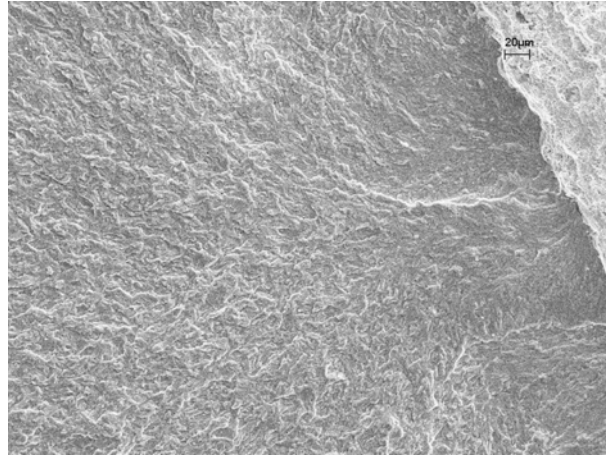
Fracture surface from specimen shot peened and coated with WC-10Co-4Cr. 400X.
